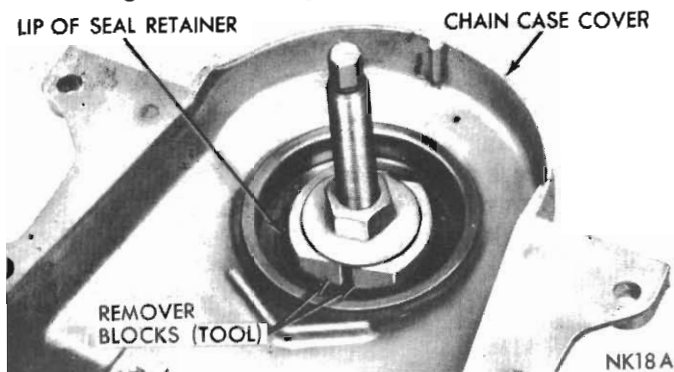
Remover block expanded to puller position (Tool E9C57A)
